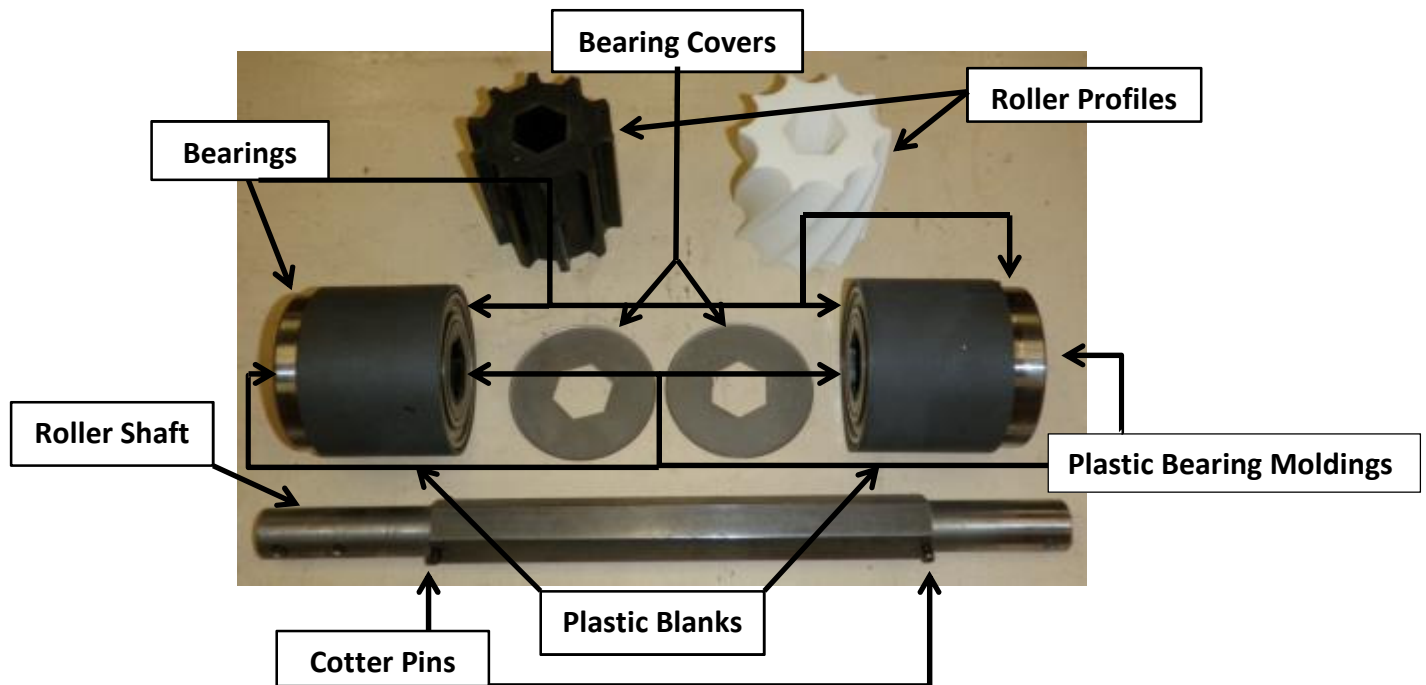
Breakdown of meter roller parts (rubber end caps not shown).
